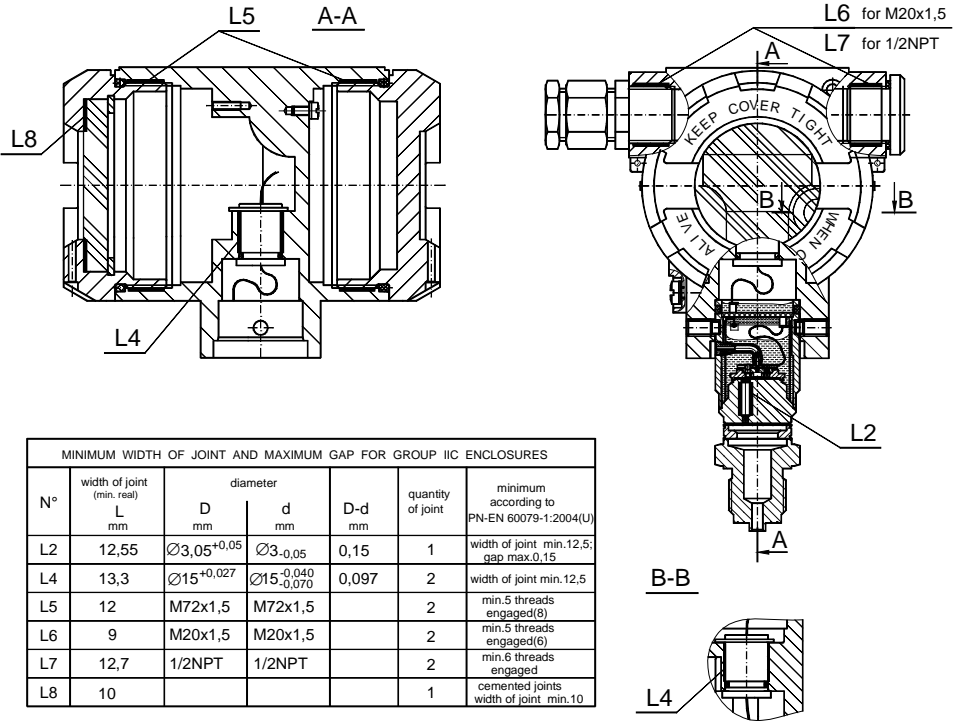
The explosion - proof joints of APC...,APR... transmitters.
